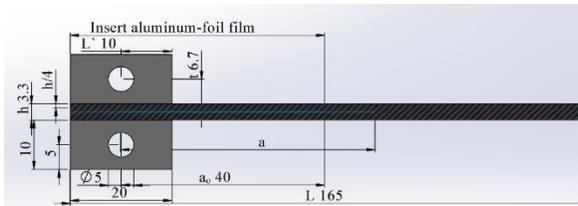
Scheme in all dimensions according to ASTM for DCB Specimen
